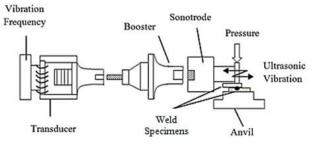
Main parts of ultrasonic welding equipment [10]
